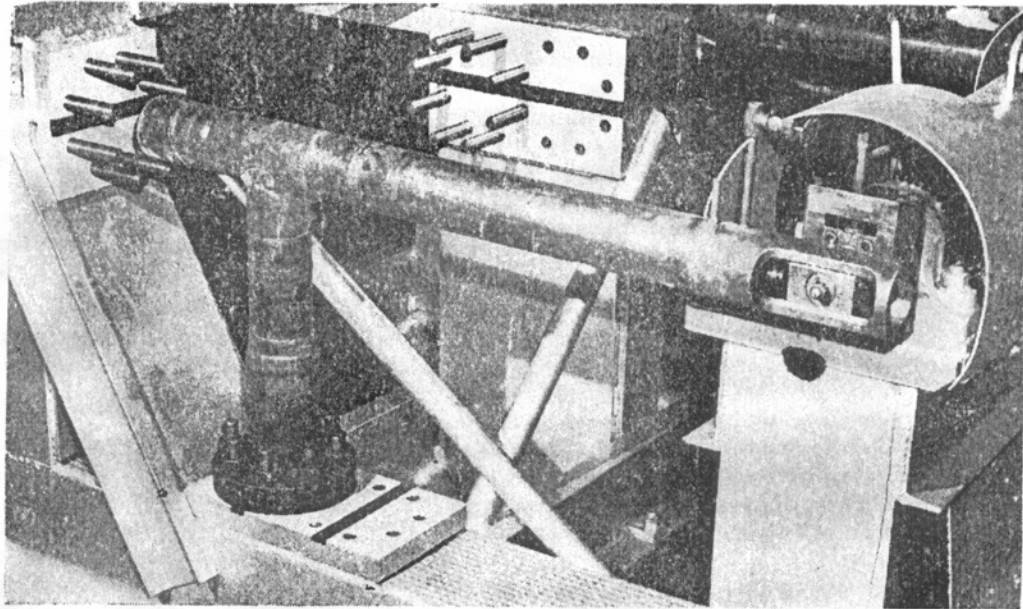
VIEW OF END BANK OF FATIGUE-TEST MACHINE SHOWING A FABRICATED TEE MOUNTED FOR IN-PLANE BENDING TEST
